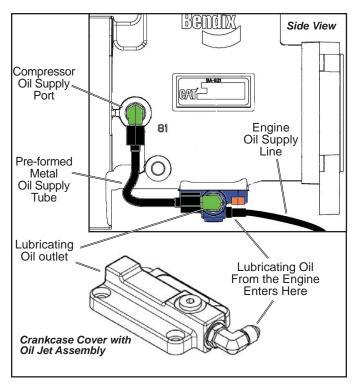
VIEWS OF SPECIAL CRANKCASE COVER WITH OIL JET ASSEMBLY FOR CAT C11/C13 ENGINE APPLICATIONS
